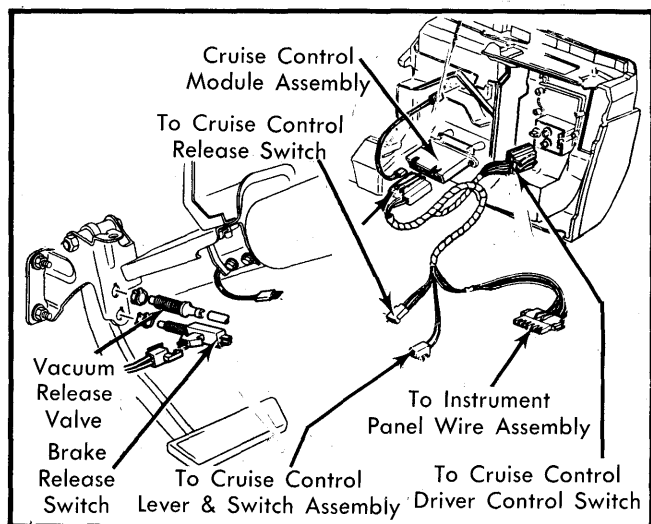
Electronic Cruise Control Component Location (Cadillac Shown, Eldorado and Seville Similar)
